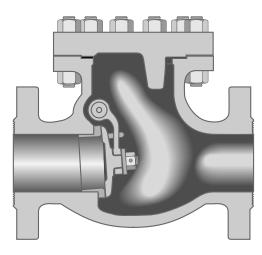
Flanged Figure 3742 Butt Weld
